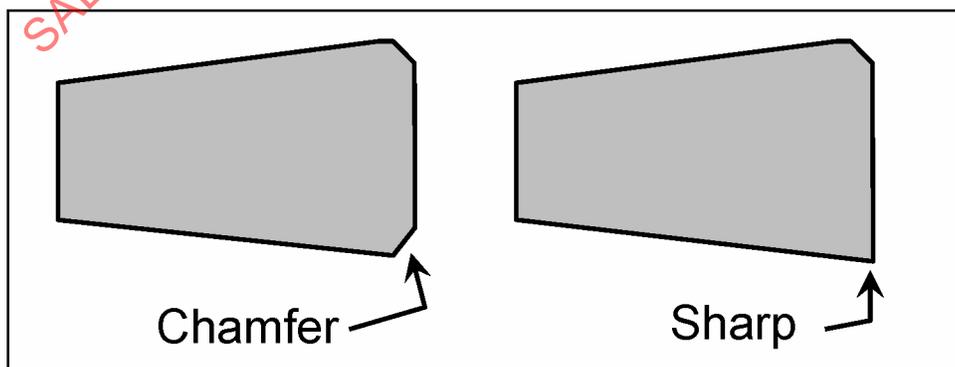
SCHEMATICS OF BOTTOM SIDE OD CHAMFERS
